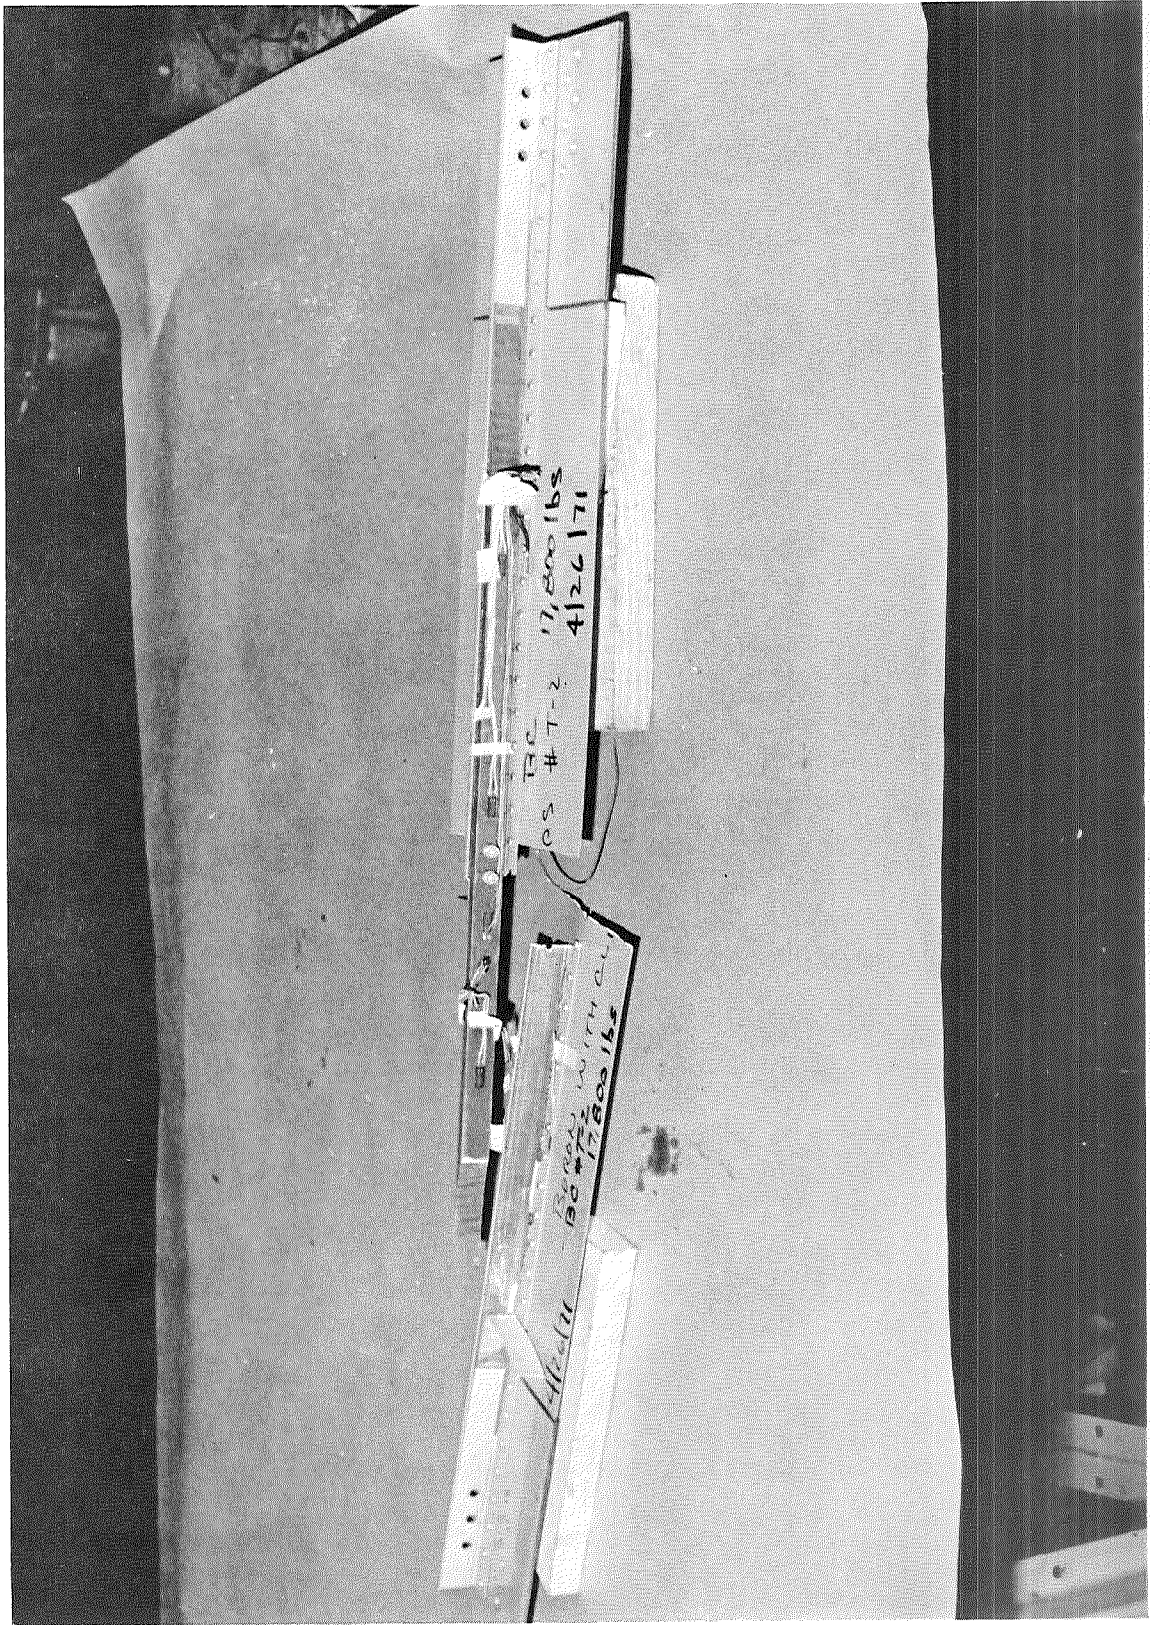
TENSILE FAILURE IN REINFORCED STRINGER SPECIMEN.
